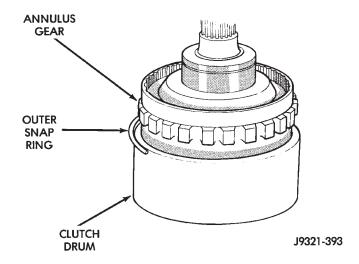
Clutch Drum And Outer Retaining Ring Installation
